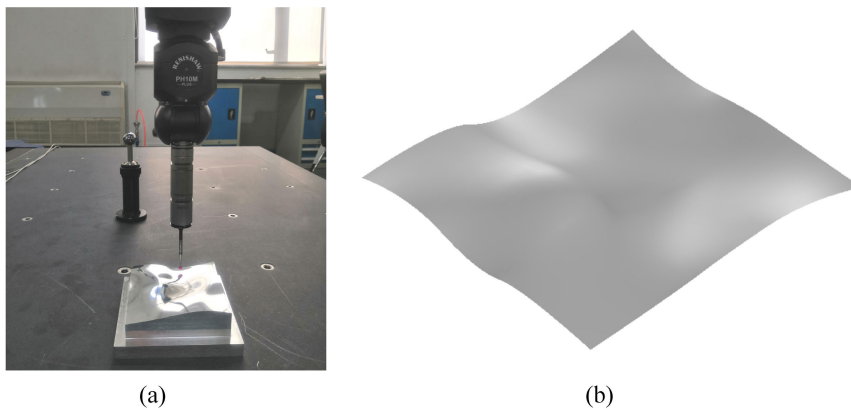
Deterministic surface construction. (a) Coordinate measurement using CMM. (b) The fitting surface in CMM inspection.
